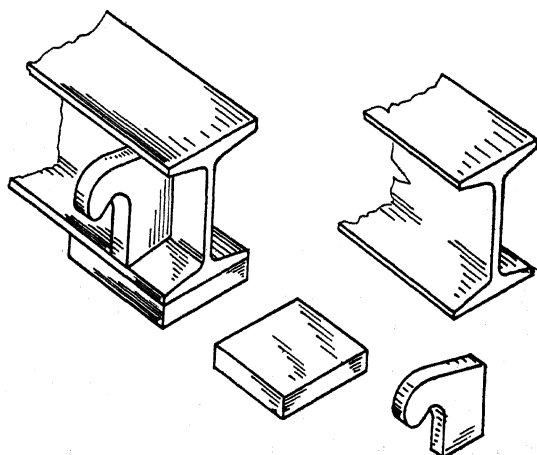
Detail of a base corner showing how a lifting hook can be applied. Note the simplicity of this construction.
